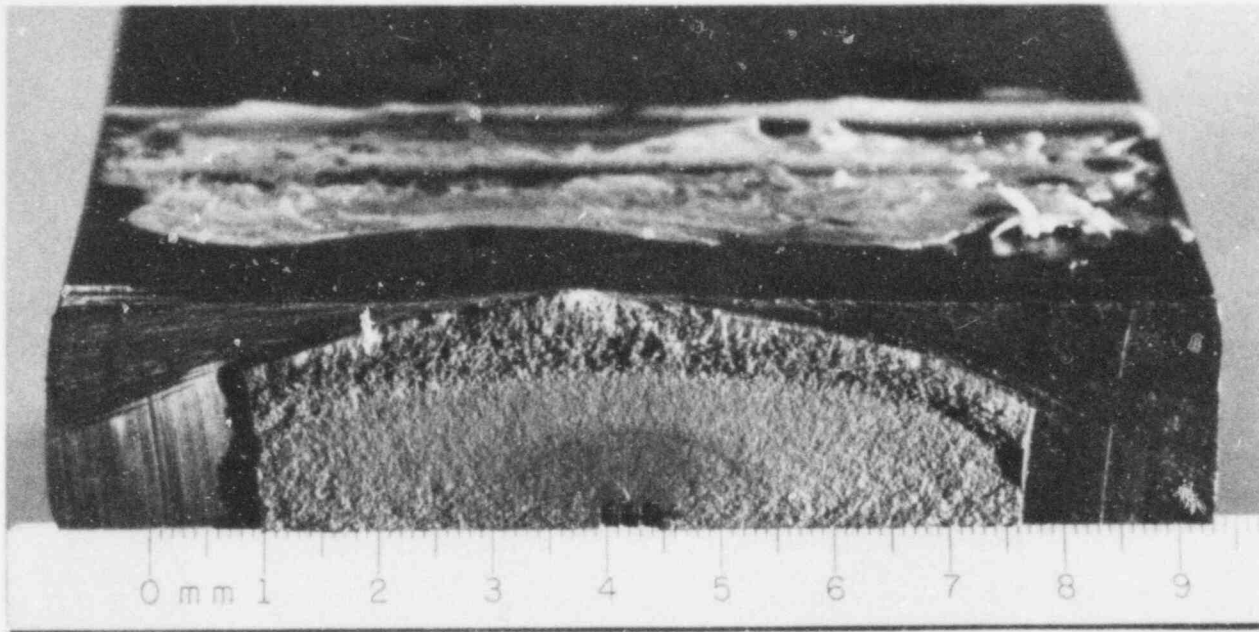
A. Photo of Fatigue Surface, Four-Point Bend Specimen. In this case, crack emanates from a drilled hole initiator. This type of notch is used to produce cracks with low aspect ratios.
